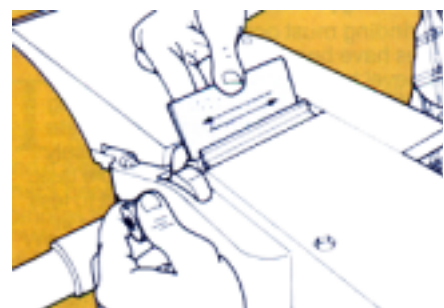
To finish honing each jointer knife, stroke the front or face of the cutting edge with a hard Arkansas oilstone.
